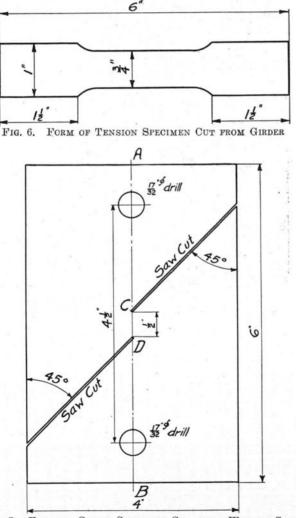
FORM OF SHEAR SPECIMEN CUT FROM WEB OF GIRDER
